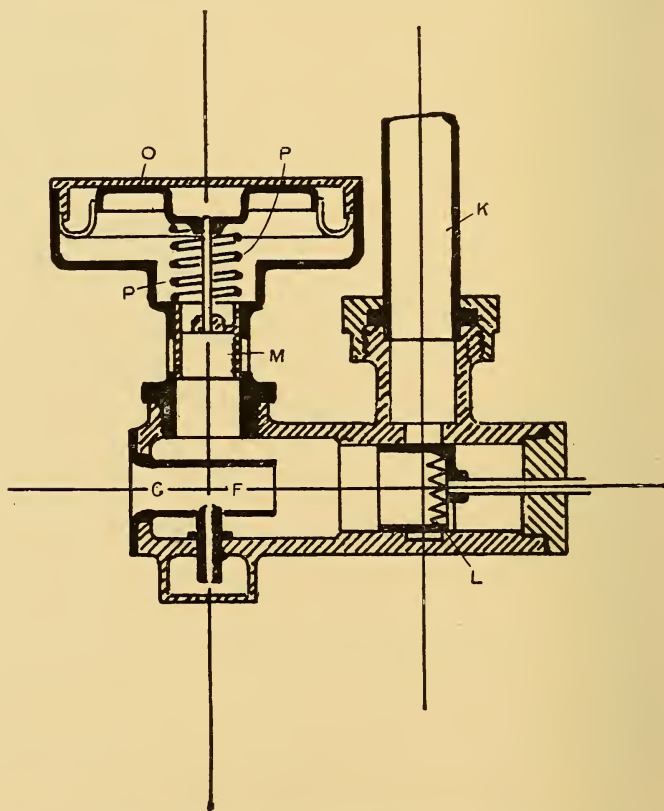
Krebs Carburettor, in which the opening to the extra air supply is controlled by the suction of the engine. It works excellently.
